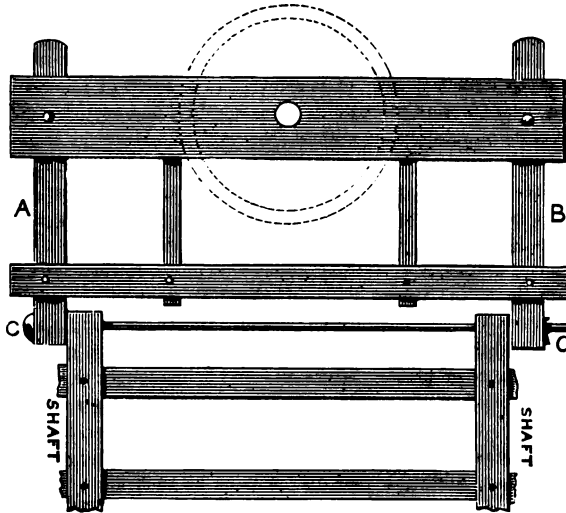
AXLE AND FORE CARRIAGE OF WAGGON.
